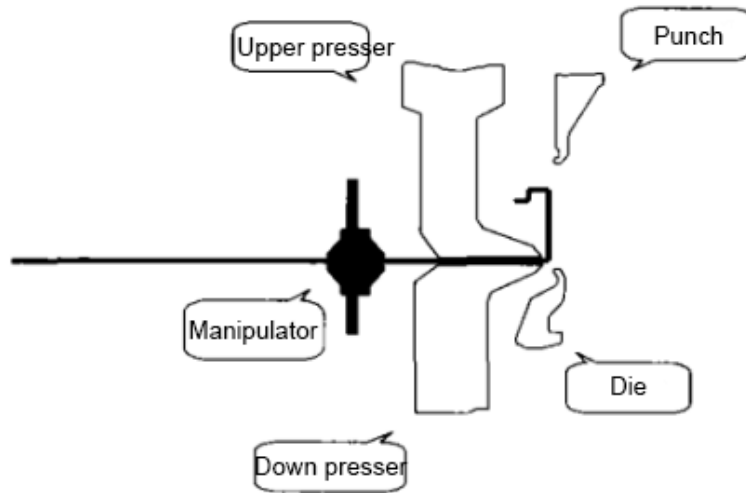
Working principle of a panel bender. (Machine MFG, 2022b.)
